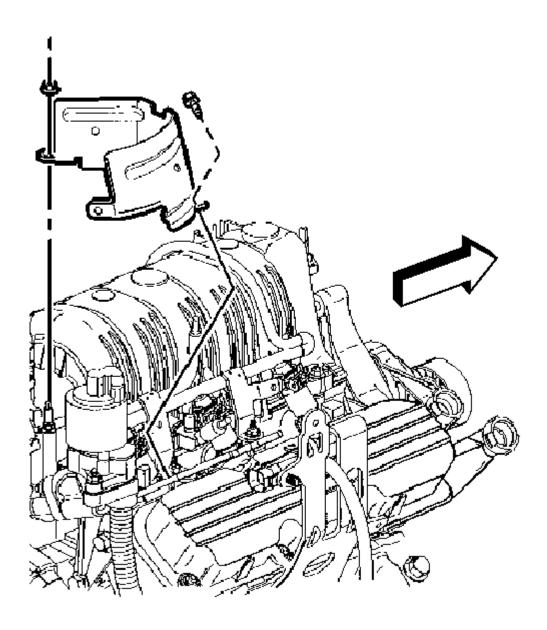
Fuel Injector Rail Courtesy of GENERAL MOTORS CORP.
